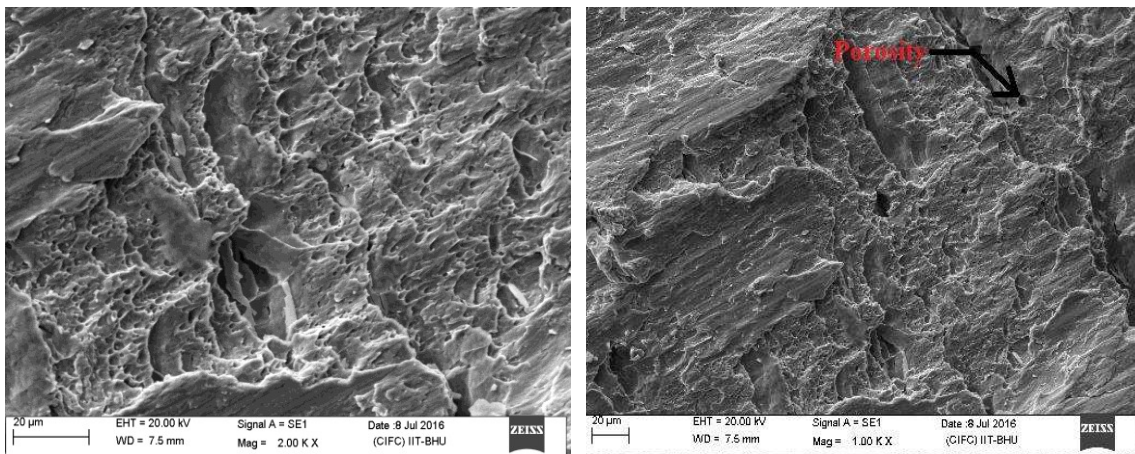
SEM image (Fracture morphology) of tensile specimen of IS 2062 steel weldment fractured at room temperature.
